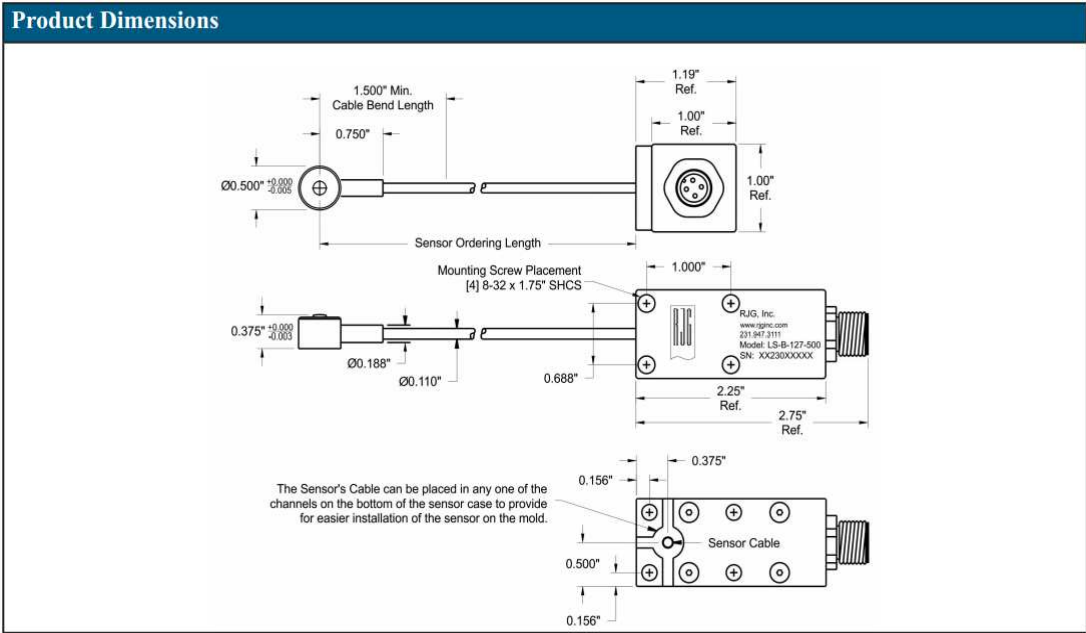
Button style cavity pressure sensor dimensions [5]
